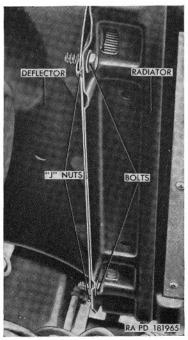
(Added) Radiator to guard panel J nuts M170-installed.
